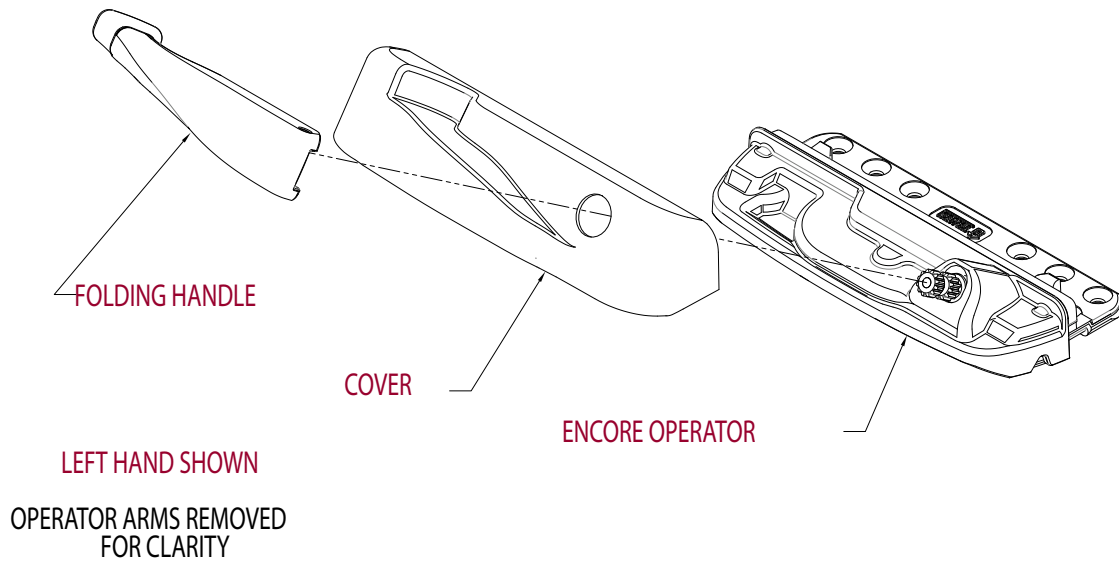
DIMENSIONS FOR TANGO FOLDING HANDLE COVER (LH) (SHOWN)
